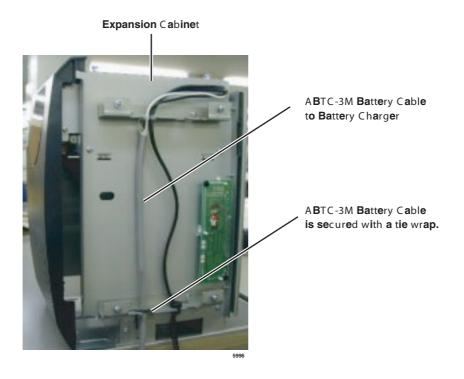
Cable Wiring for the Expansion Cabinet (Side view)
